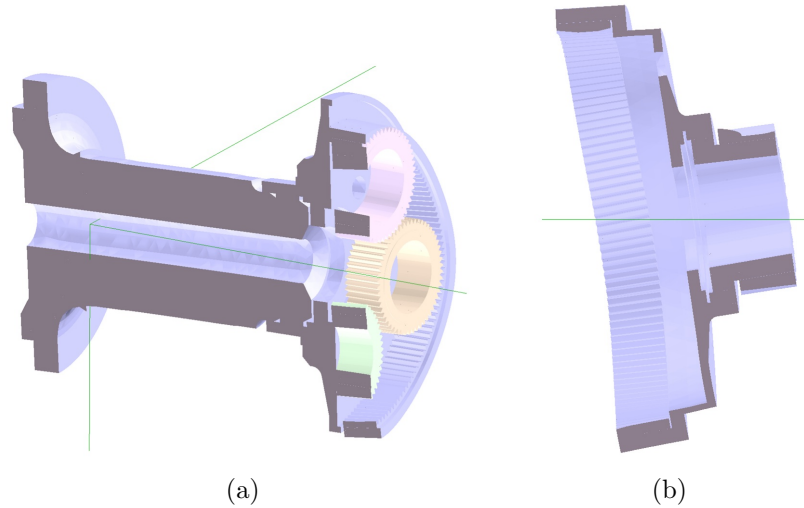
W2000 components shown with exaggerated deformation: (a) main rotor shaft-stage 2 carrier subassembly, and (b) stage 2 ring-drive flange 2 subassembly.
